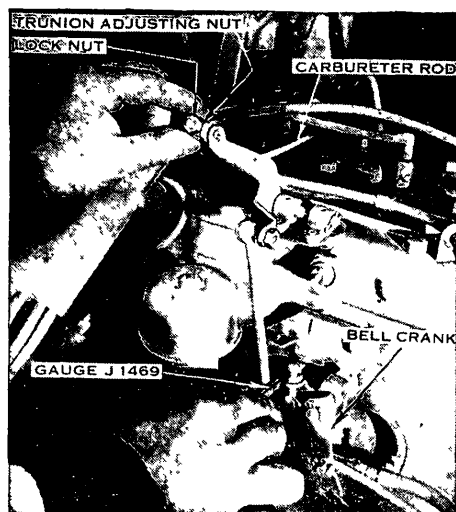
Adjusting carburetor rod, 1941-48 Hydra-Matic
